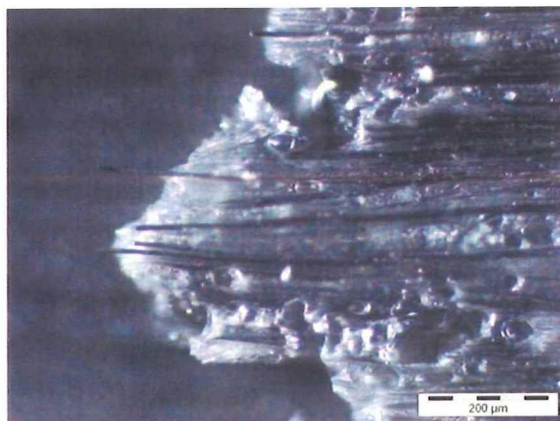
First ply failure at fracture surface of sample clip welded at 600 [J]. Fibers stick out of broken lamina.
